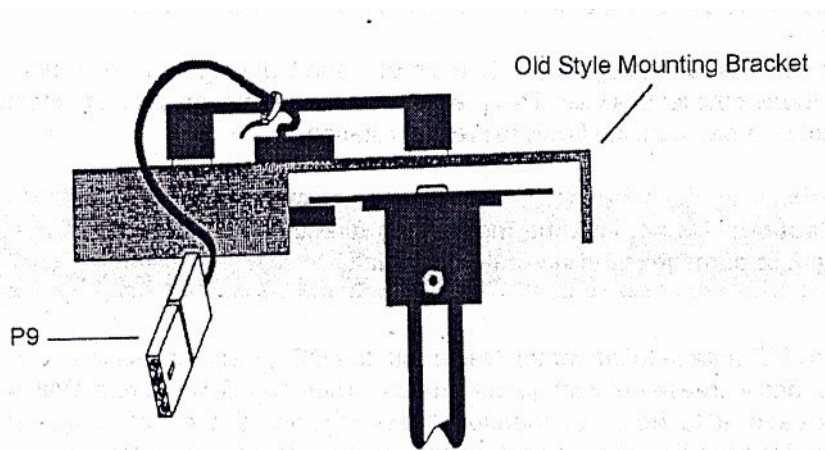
Old Style Opto-Switch Mounting Bracket
